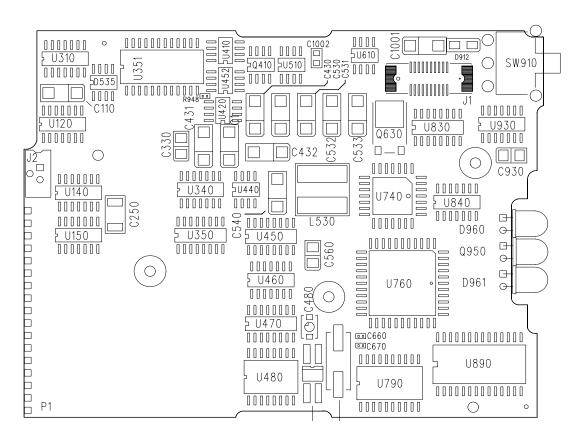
Main board components (front view) for P/N 670-0303-11 (and later versions)
